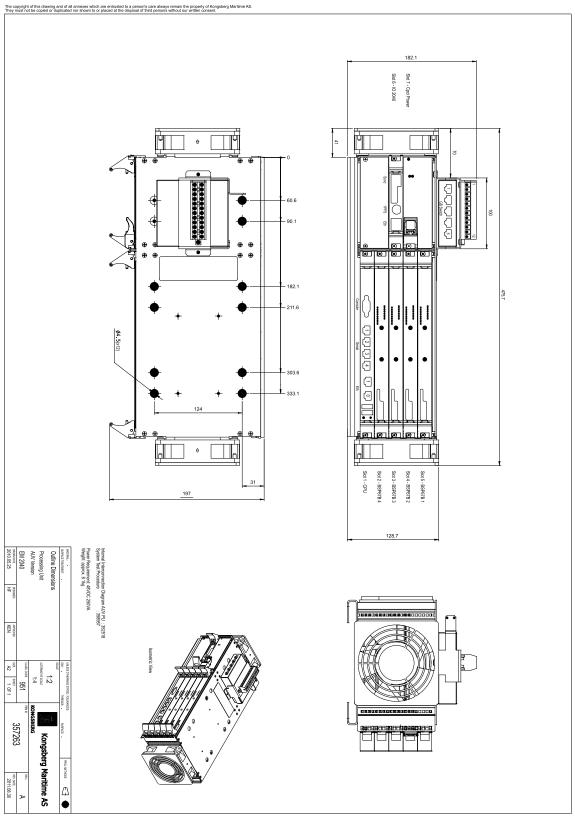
Processing unit compact/AUV sphere version – Outline dimensions
